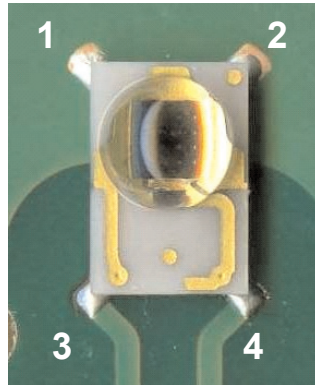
LUXEON Rebel reflowed into PCB with four solder-ability indicators.
